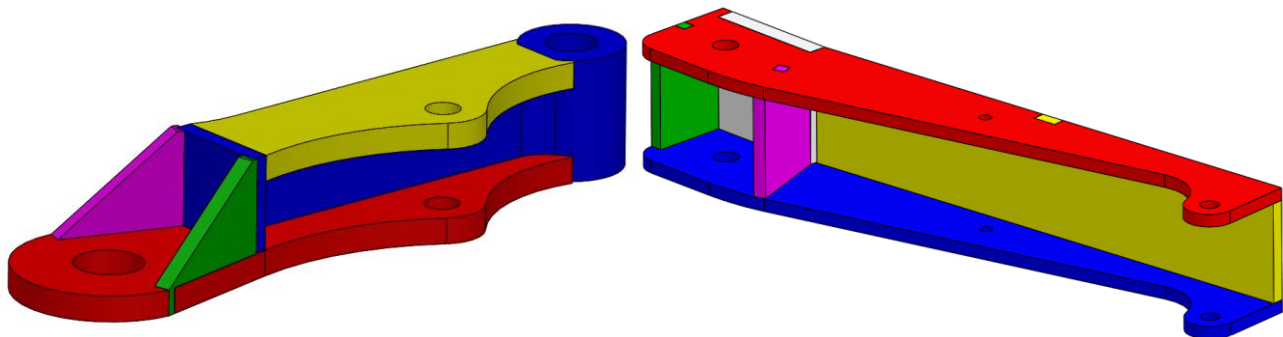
Welded sections of the linkage arm (left) and mounting bracket (right)
